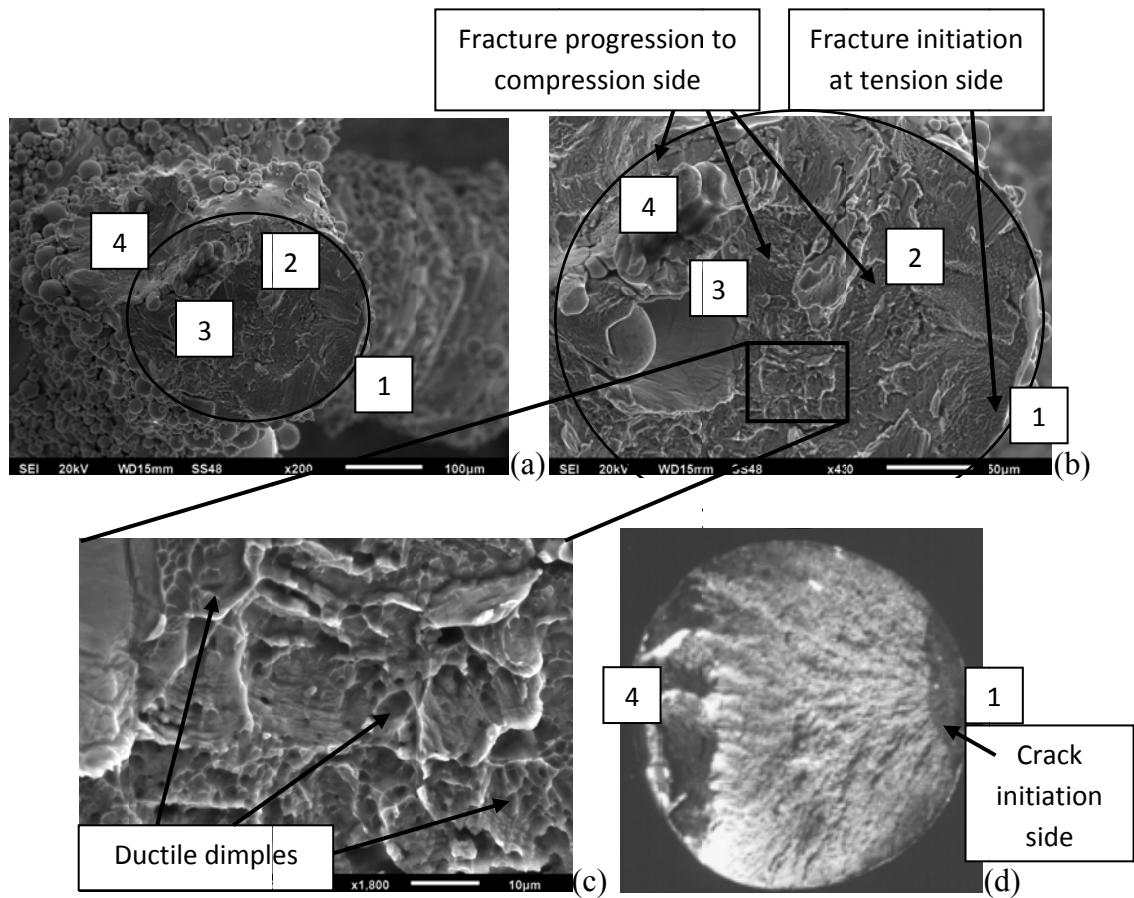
(a), (b), (c) Fracture surface of a failed strut in the as-received SLM Ti-6Al-4V BCC micro-lattice block (160Wx1000μs) [B1-160-1000-AR] at different magnifications; (d) A comparable fracture surface of metal rod due to bending failure; 1 = tension side, 4 = compression side [Becker and Garry (2002)]
